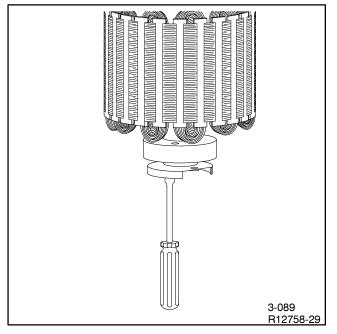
Mounting Photo Transistor Board and Magnetic Actuator
